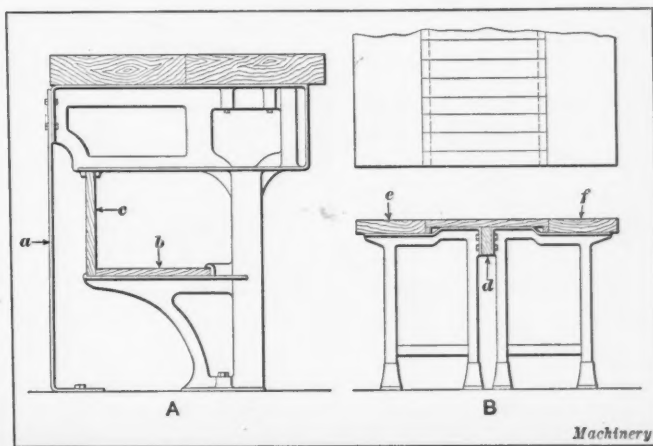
(A) Method of supporting Pedestal Type of Bench Leg set away from Wall. (B) Two Single-width Bench Legs bolted together
